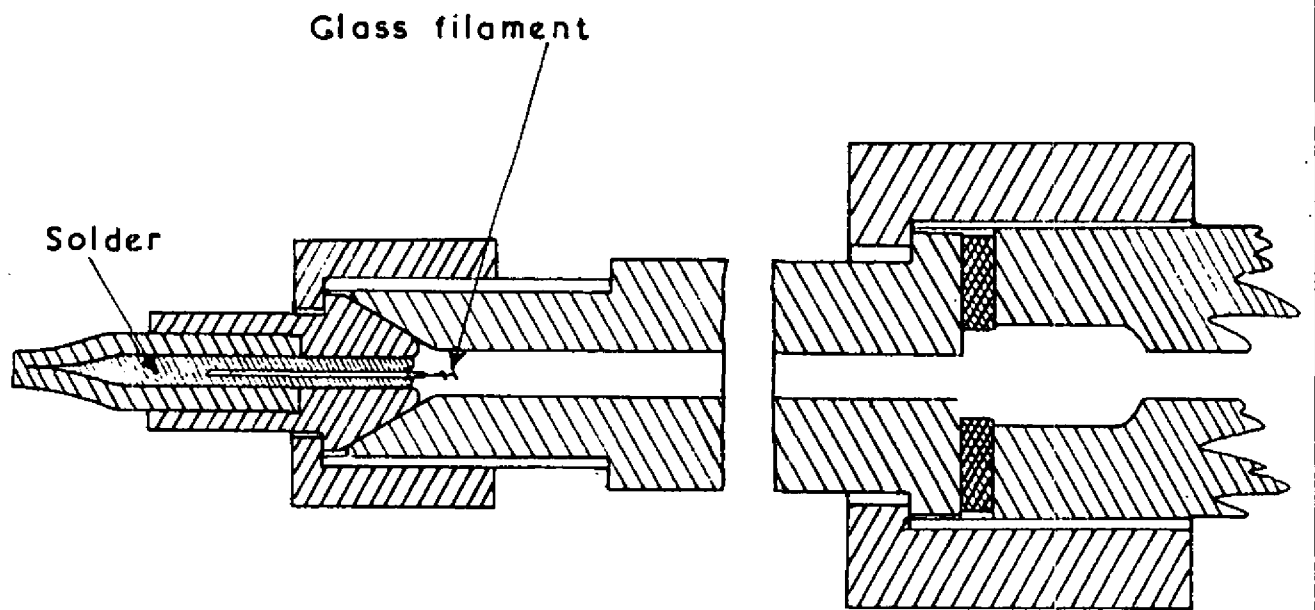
DIAGRAM SHOWING GLASS FILAMENT CARRYING GRAINS OF HEAT SENSITIVE PAINT INSERTED IN ADAPTOR FITTED TO CROSS PIECE OF OXYGEN BOTTLE
